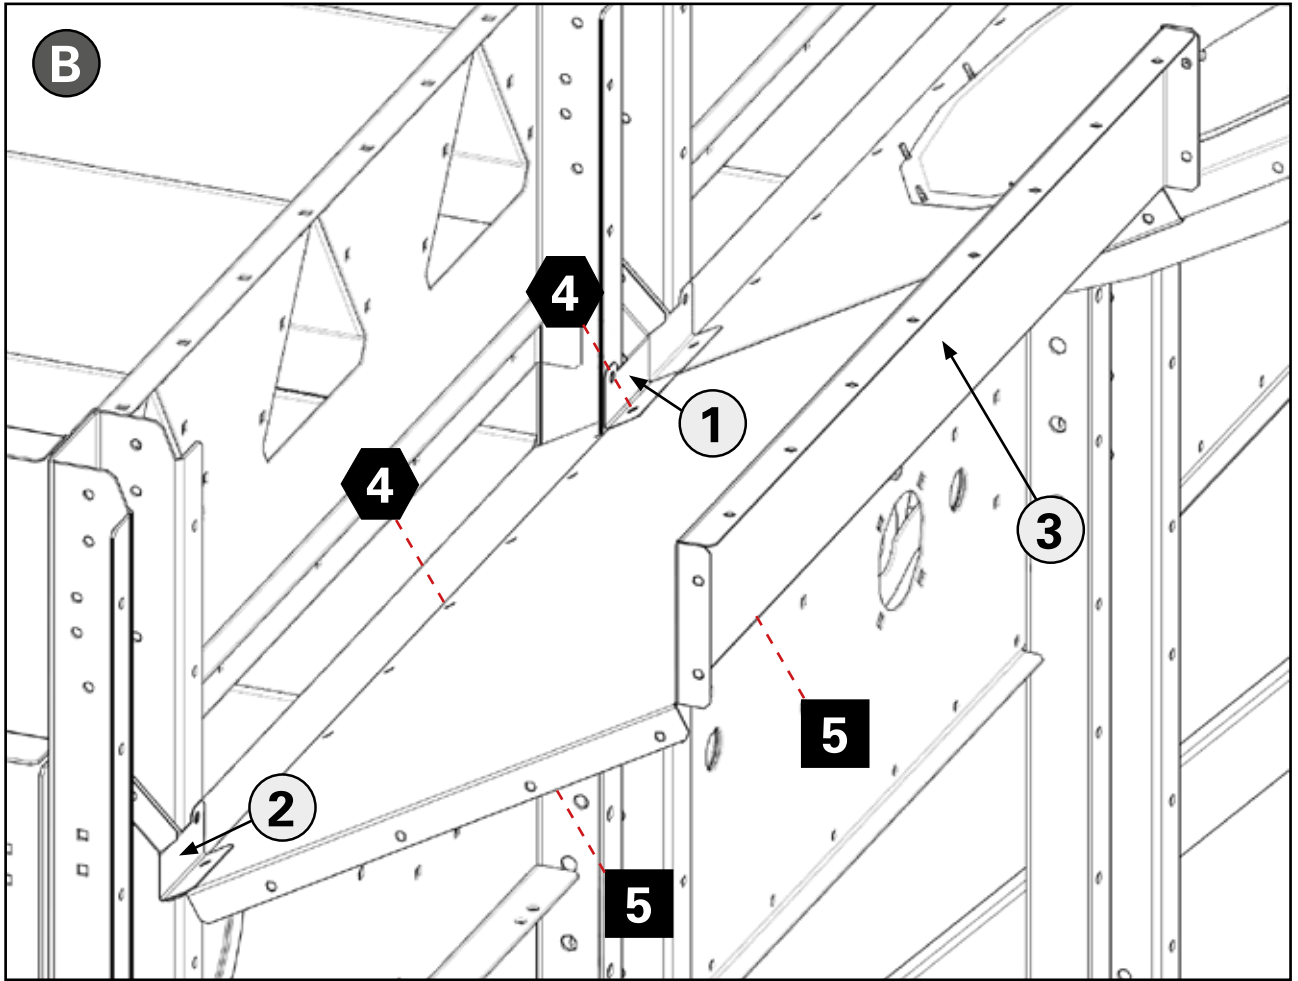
Attaching the air casing panel to the feeding apparatus
